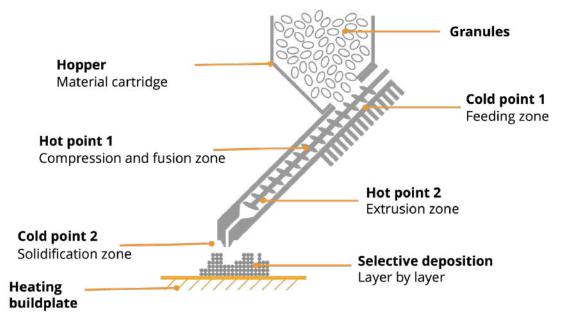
Pam 3D printer's extrusion melting and deposition system.
